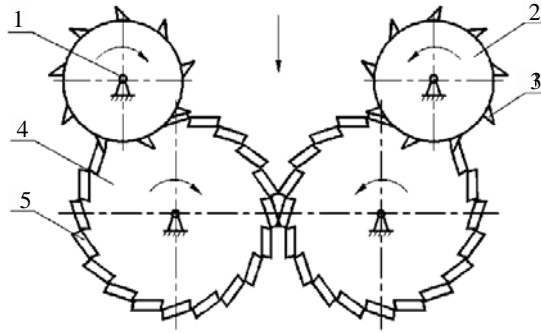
Disc cutting blades: 1 – shafts; 2 – disk knives; 3 – cutting elements; 4 – toothed discs; 5 – teeth [23]
